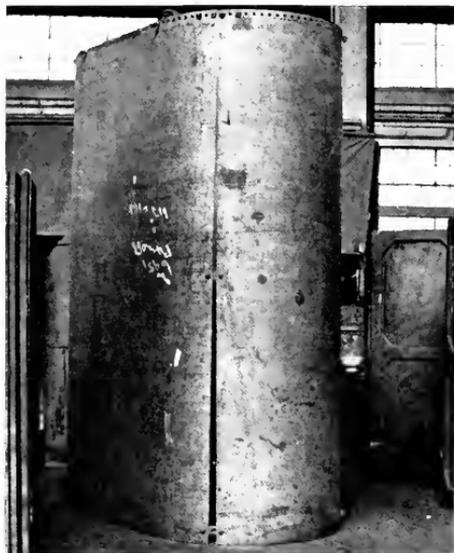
Appearance of a Long Seam Ready for Welding. Note the bevel of the plate edges, the V shape of the seam, and the method of clamping
